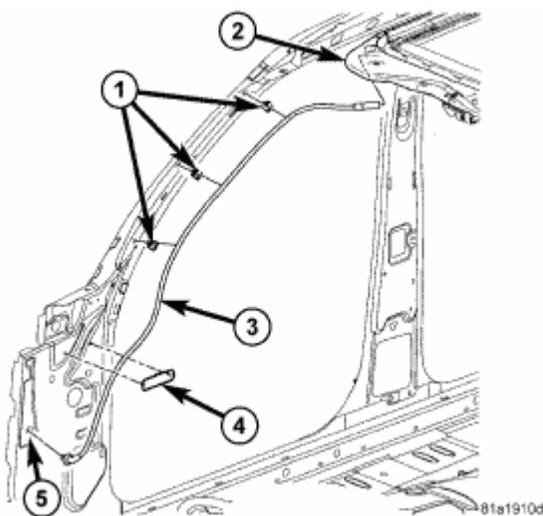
Disconnecting/Connecting Front Drain Tube At Sunroof
